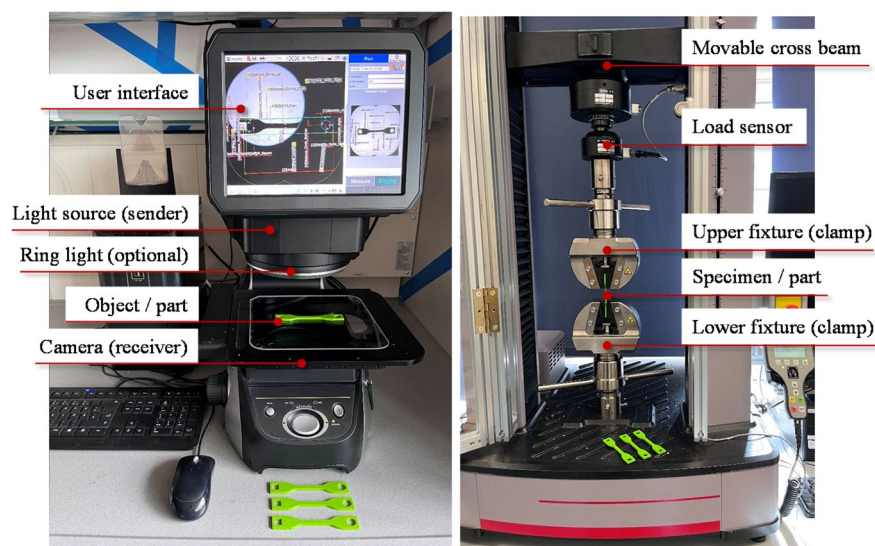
Measurement setup with a part placed in the Image Dimension Measurement System (left) and the tensile test machine (right).
